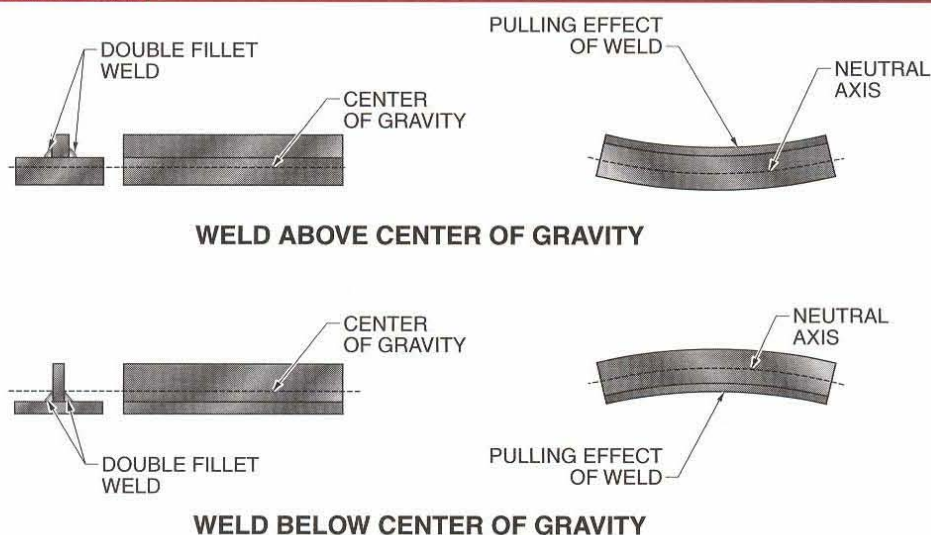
In a double fillet weld, longitudinal distortion is determined by the location of the center of gravity.
